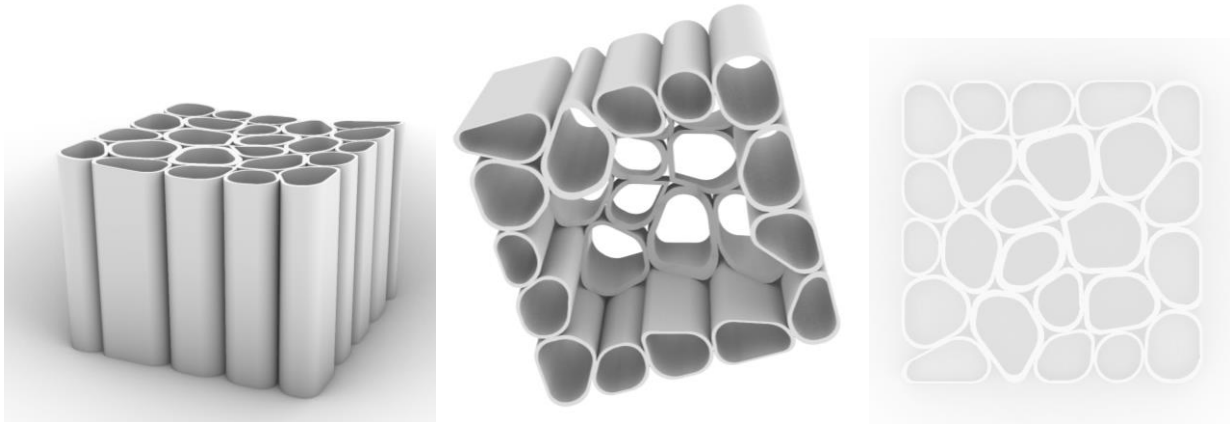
Left: Perspective View Center: Bottom Perspective View Right: Top View
